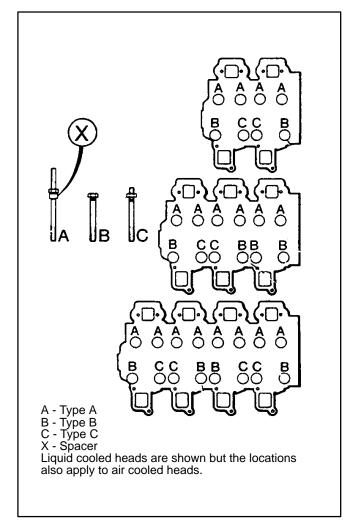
CYLINDER HEAD BOLT LOCATIONS
